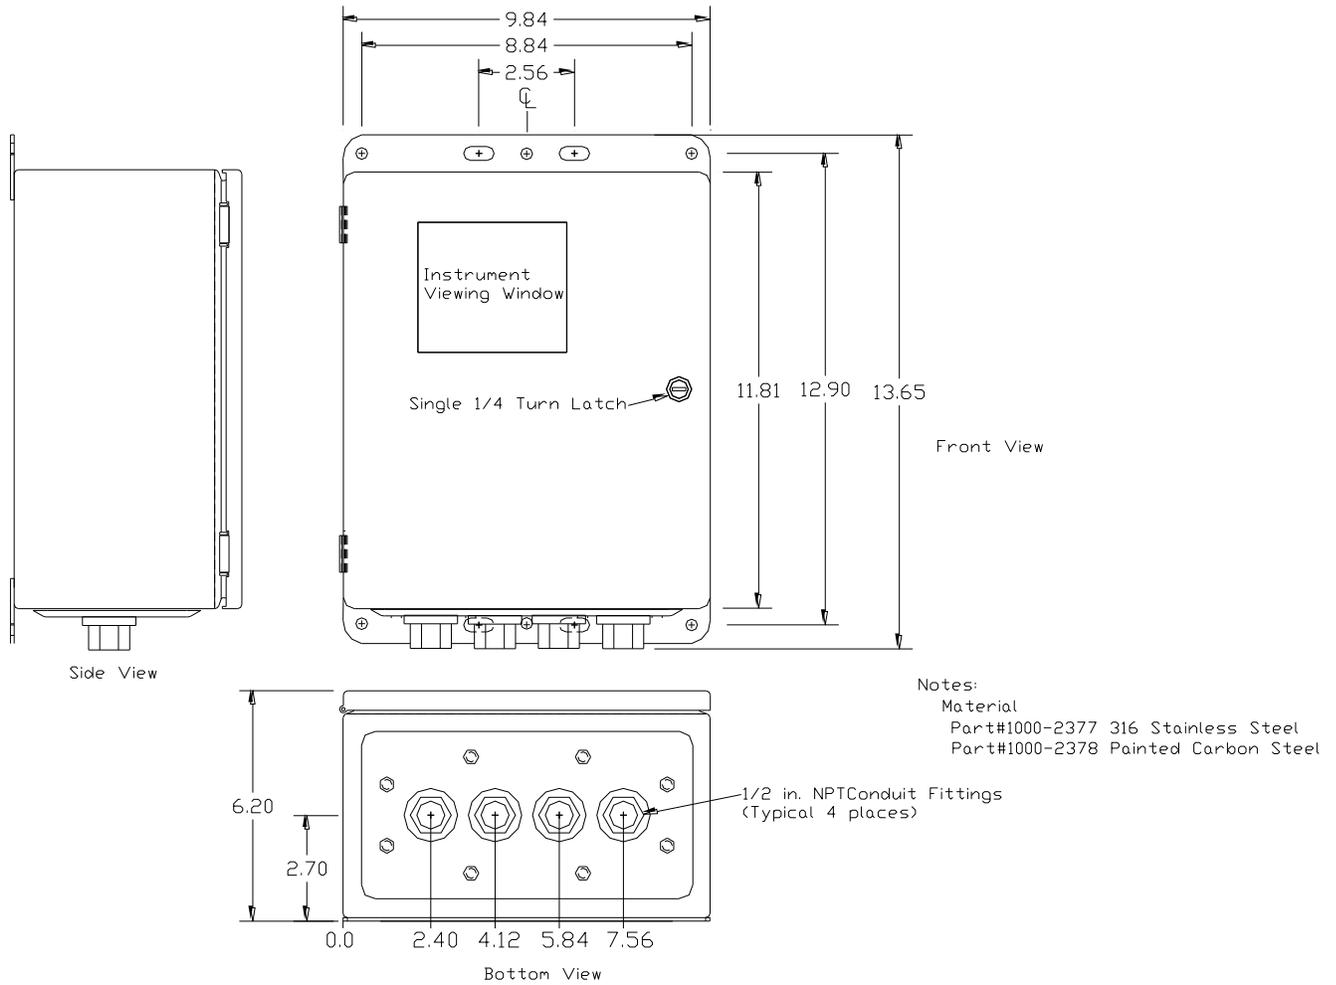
WLR/SS NEMA 4X Stainless Steel Wall Mount Enclosure
